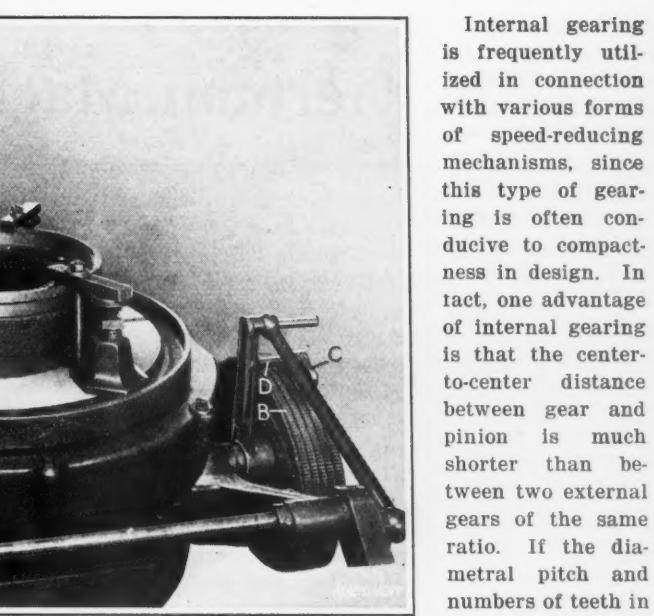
Internal Gear-cutting Operation on Automatic Machine of Slotter Type
